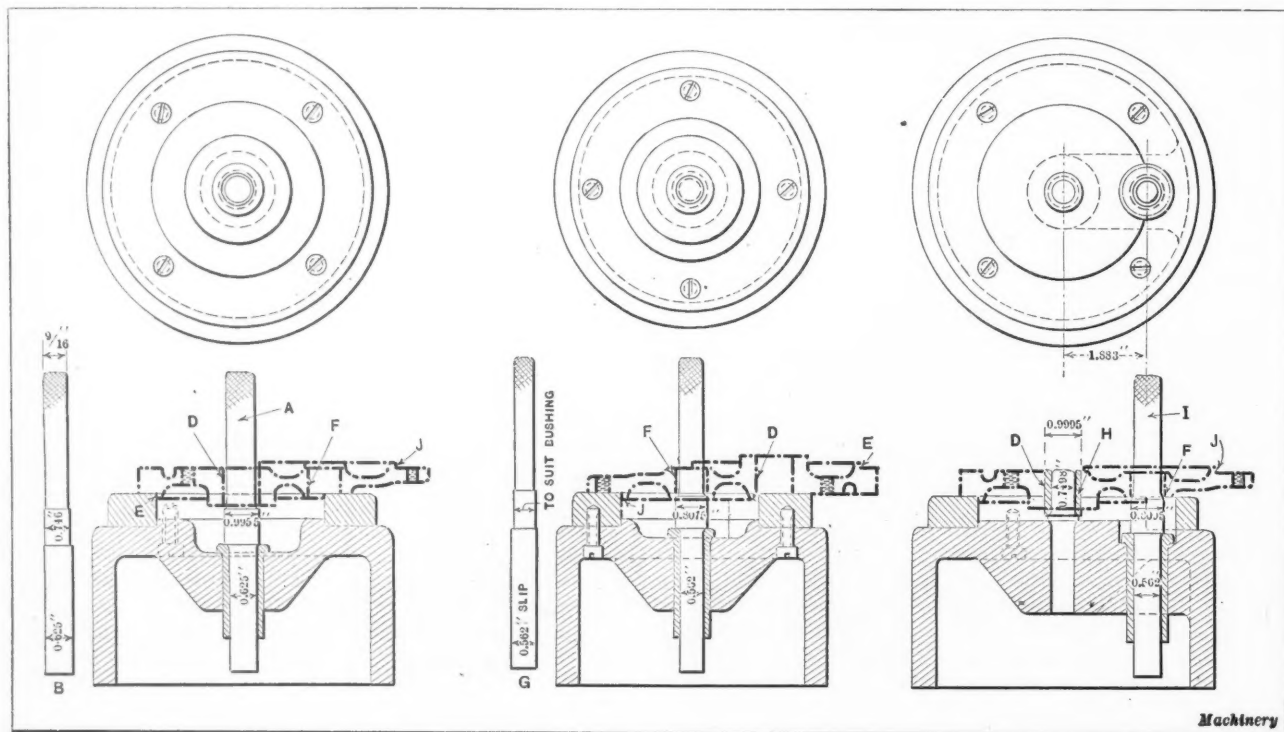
Series of Concentricity Gages used for inspecting the Relation between Various Surfaces of a Bearing Plate
